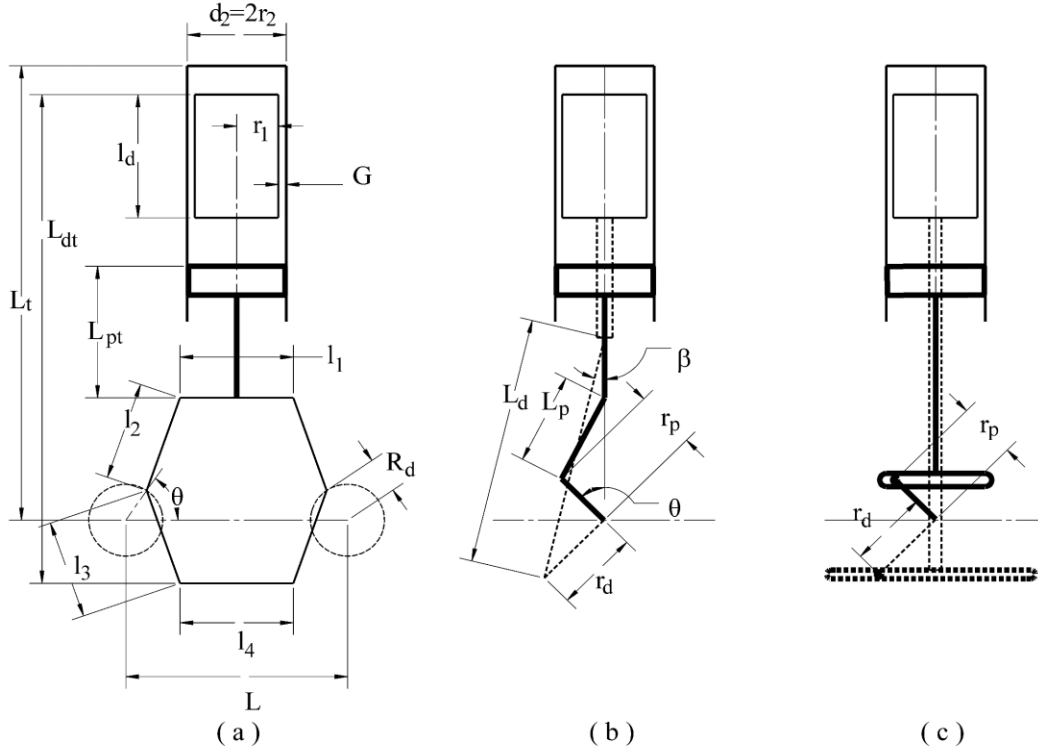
Stirling engine motion mechanisms; (a) Rhombic, (b) Crankshaft, and (c) Scotch mechanism.
